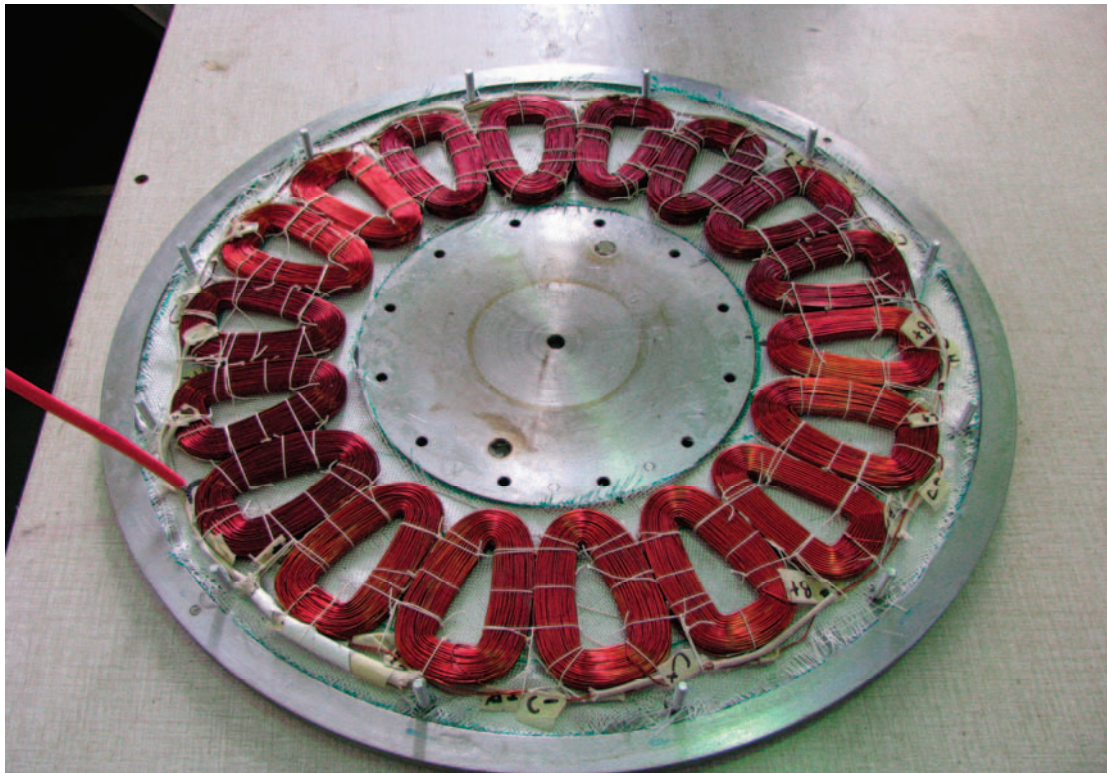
Stator coil layout in the casting mould before adding the epoxy.
